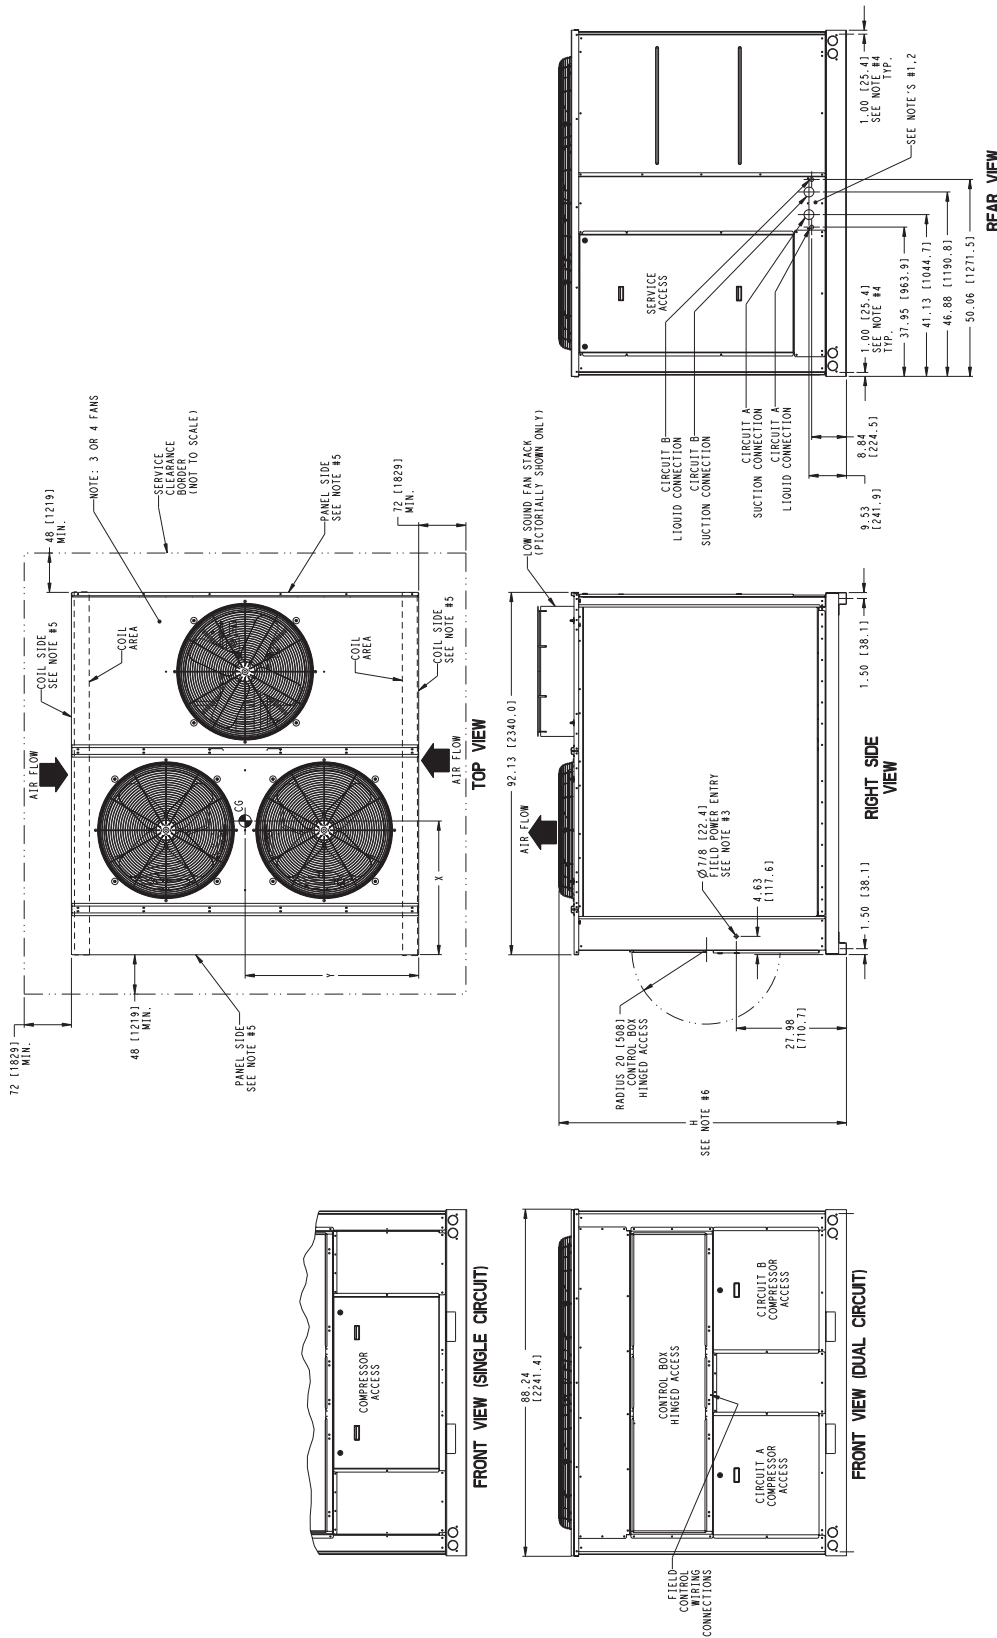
38AP Unit Dimensions, Sizes 040-060
